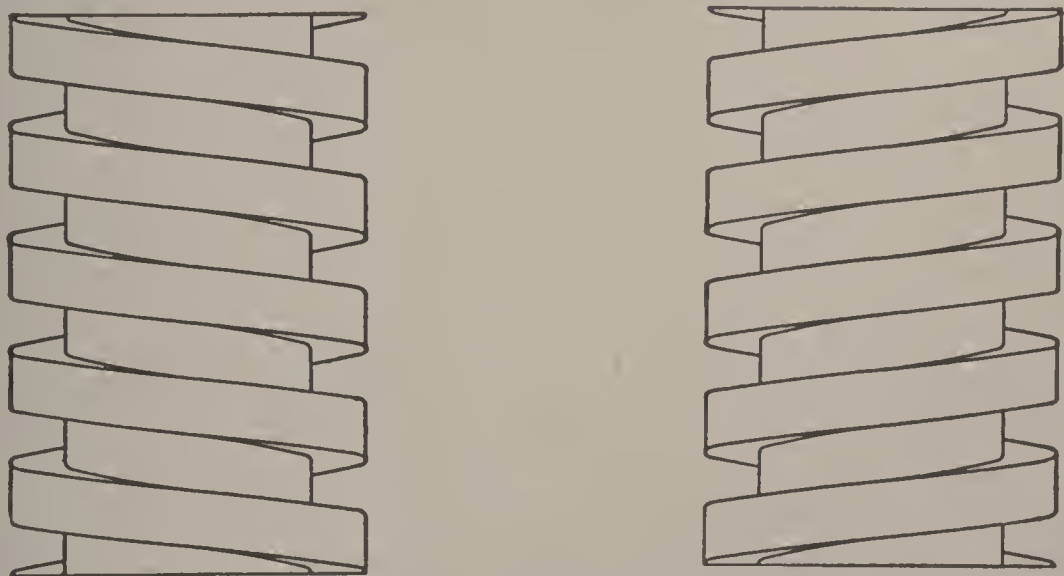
Simple Drawing of Left- and Right-Handed Square Screw Threads
